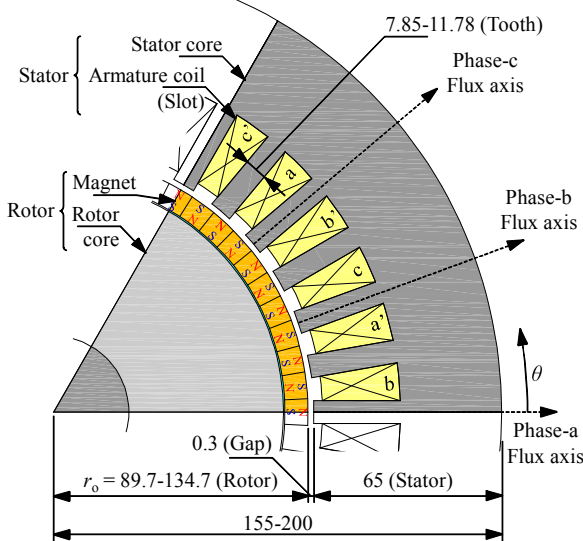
2-pole section of SPM-type vernier motor. (Units: mm)
